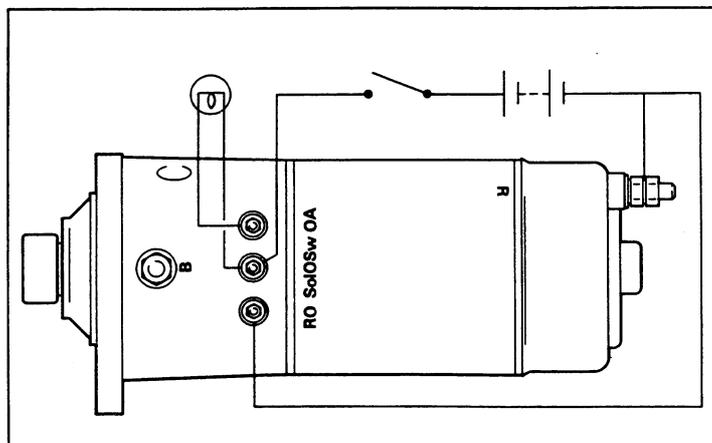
Final test to check leaf spring adjustment, after assembly of starter.
